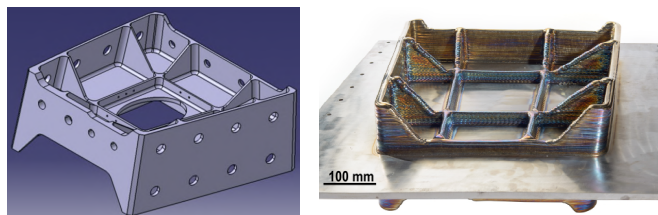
Outboard landing gear rib (24 kg) produced in Ti-6Al-4V by Wire + Arc Additive Manufacturing (WAAM): CAD model (left, courtesy of the Welding Engineering and Laser Processing Centre at Cranfield University) and printed part before machining (right, [352]).
